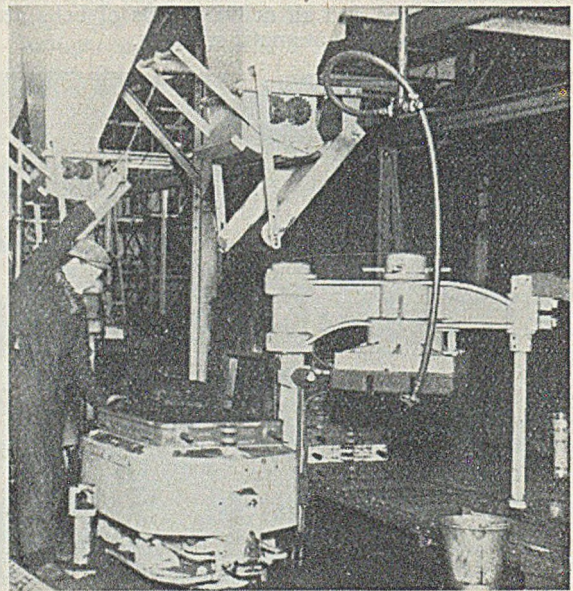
One of the B.I. Squeeze-strip Moulding Machines with Sand Hopper Above.
